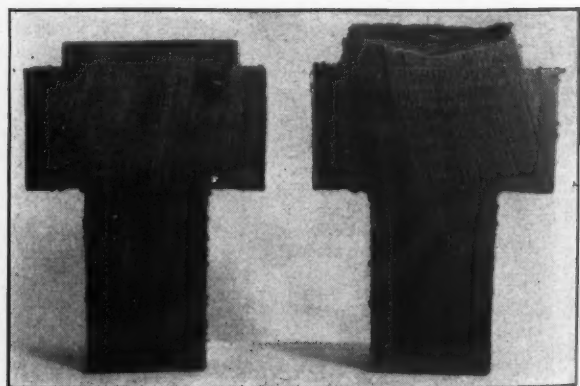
Test casting of nickel-copper alloy (monel metal);  $2\frac{1}{2}$  lb. exothermic material in riser. Note that solid casting has been produced with extremely shallow riser.
